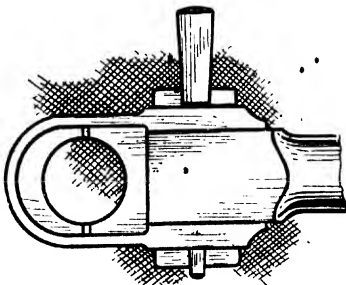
CONNECTING-ROD BEARING ADJUSTMENT
